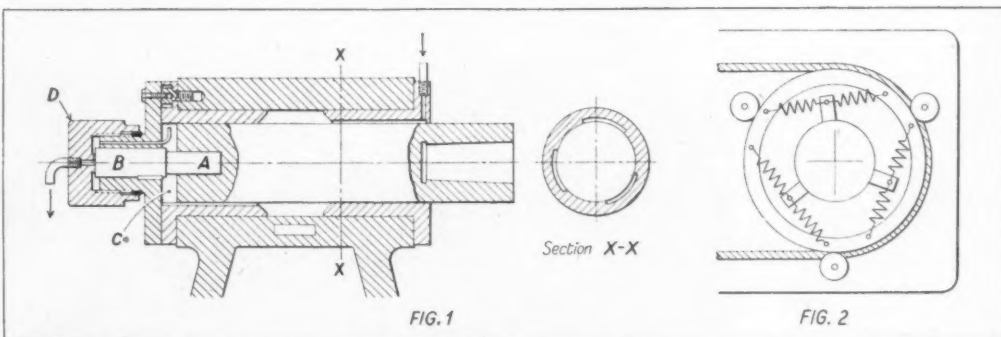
Sectional View of a Lathe Headstock Spindle Designed by Philips Research Laboratories, Eindhoven, for Precision Facing Operations. Reduced Air Pressure in the Compartment C Causes the Spindle End to be Held in Contact with the Thrust Block B. Fig. 2. The Pulley for Driving the Spindle on the Precision-facing Lathe is Supported on Three Rollers, and the Drive is Transmitted Through Steel Springs
